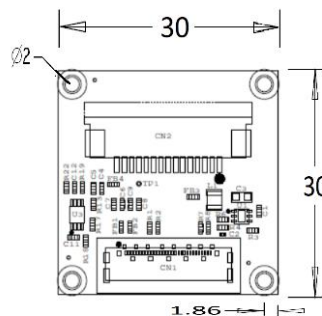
Front View of NANO Adaptor Board Mechanical Dimensions
